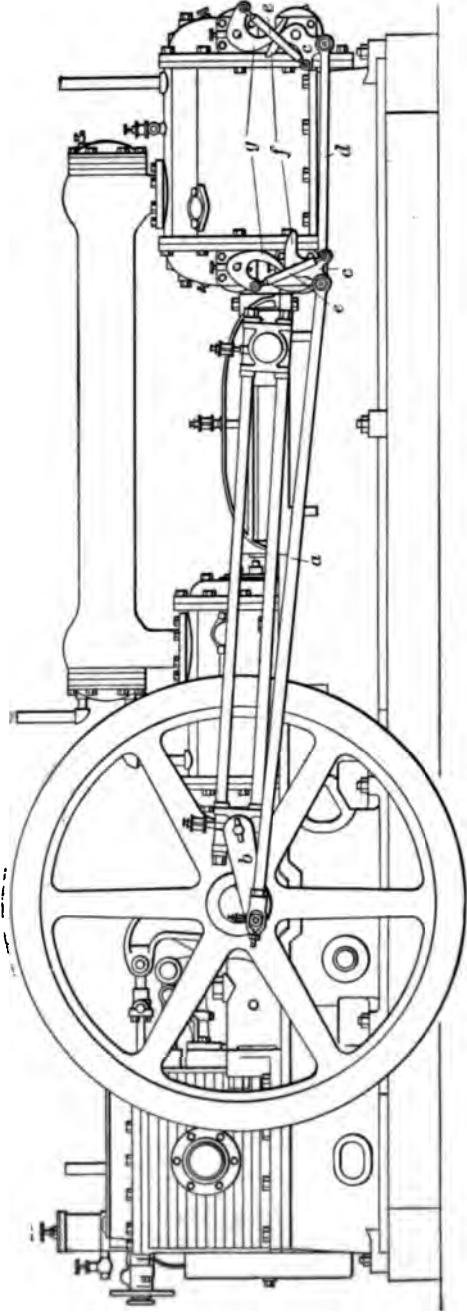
Valve Motion of Low-Pressure Air Cylinder. Norwalk Compressor.
